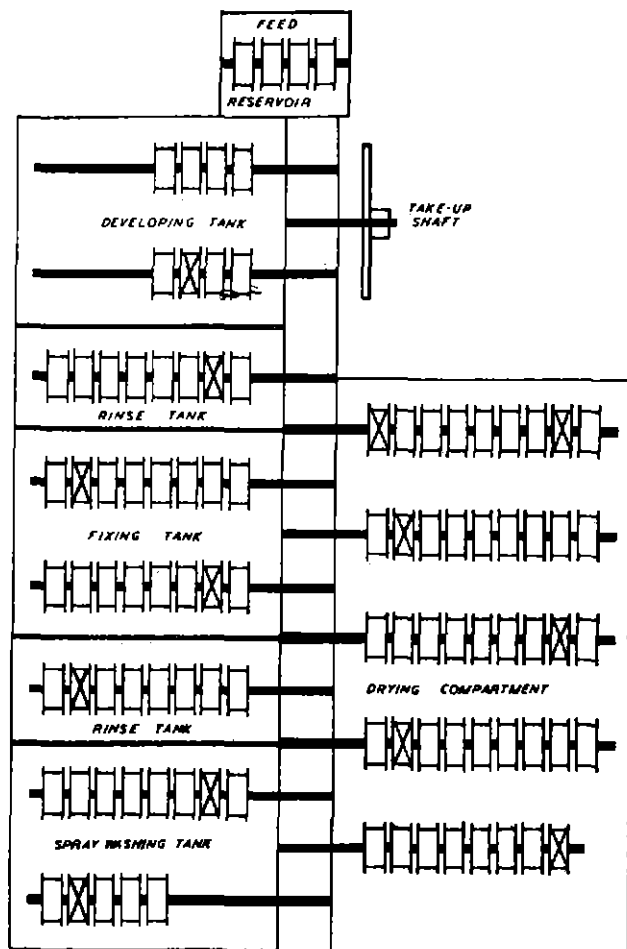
Plan view of upper roller assemblies showing positions of positive driving sprockets
